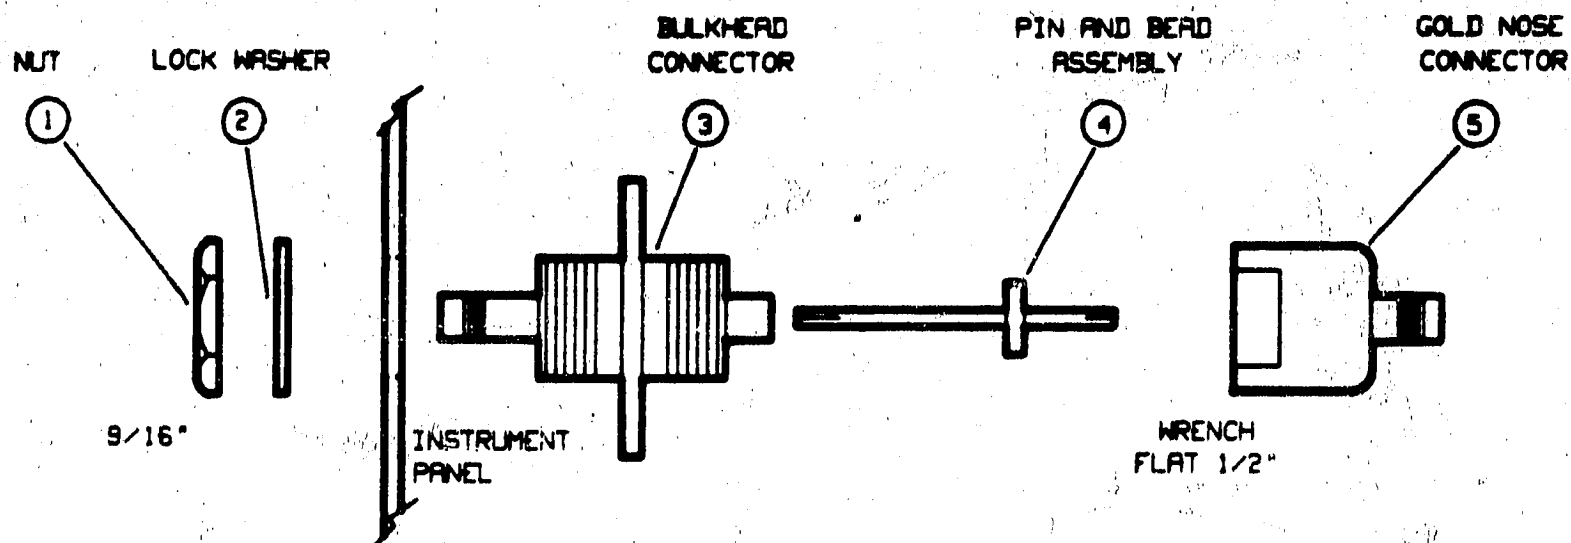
Exploded Diagram of 3.5 mm Connector
